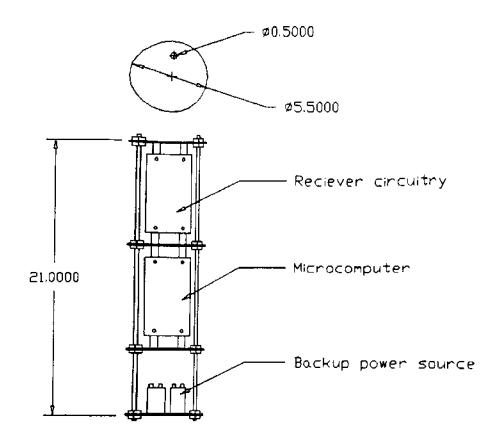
Circuitry Rack Assembly (Dimensions in Inches)
